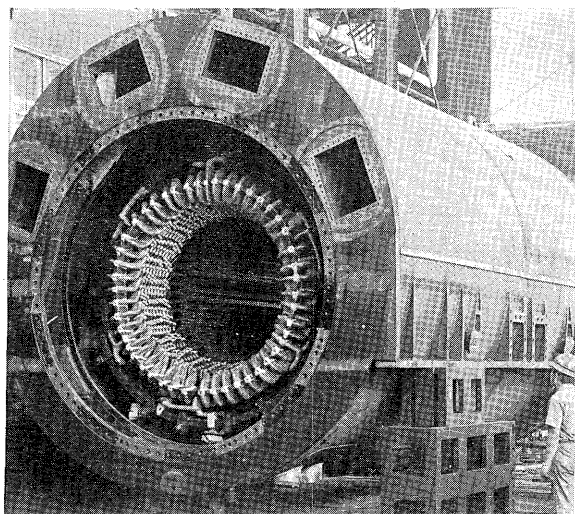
Stator winding of F-Resin insulation (250 MVA turbine generator)
